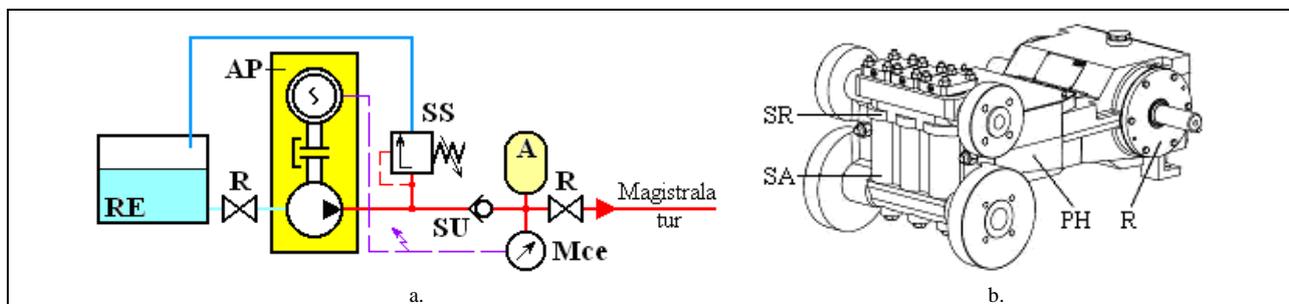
ACH 40/200 pumping assembly: a. hydraulic diagram; b. basic structure of the three plunger pump: PH - pump, R - reducer, SV – suction valves, DV – discharge valves.
